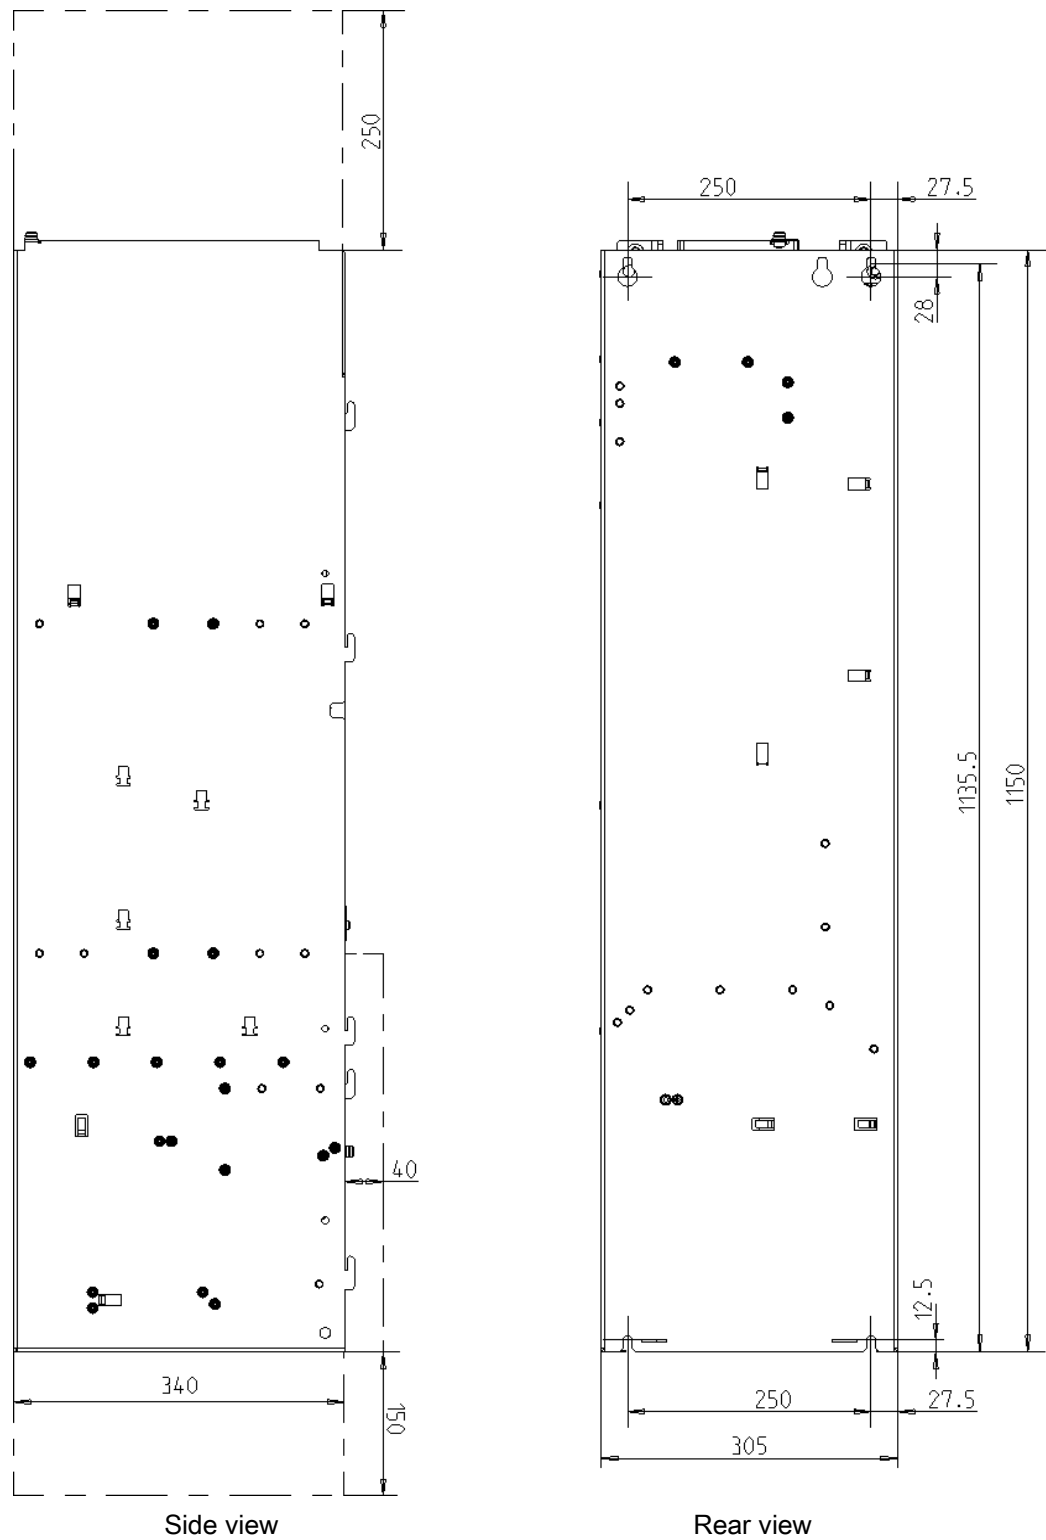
Dimension drawing of Basic Line Module (type FB)
